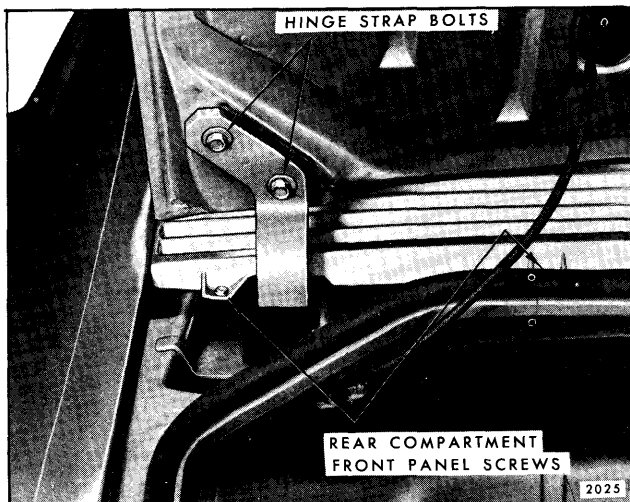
Rear Compartment Lid Attachments - Oldsmobile and Buick "E" Styles
